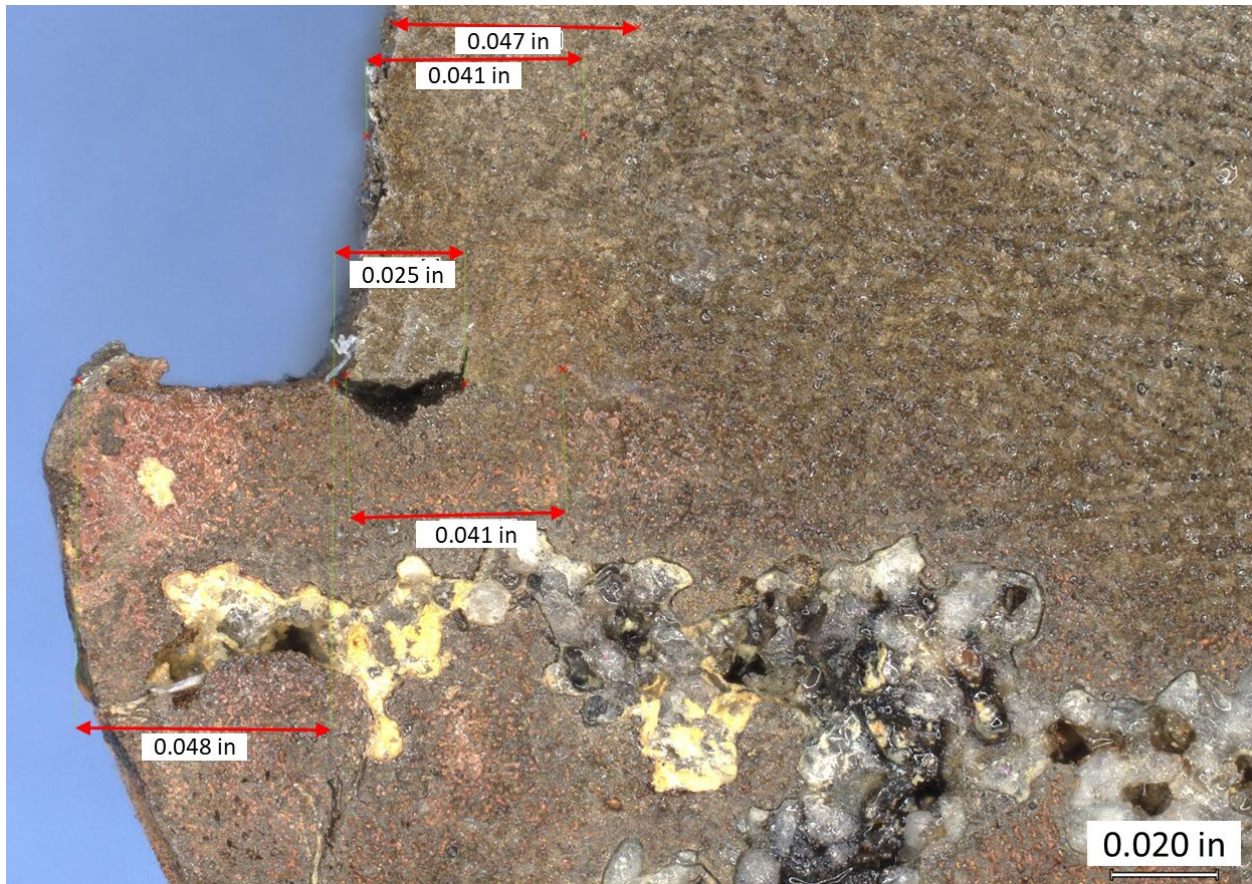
Closer view of the weld and flash side of fracture surface 'A', annotated with measurements.
